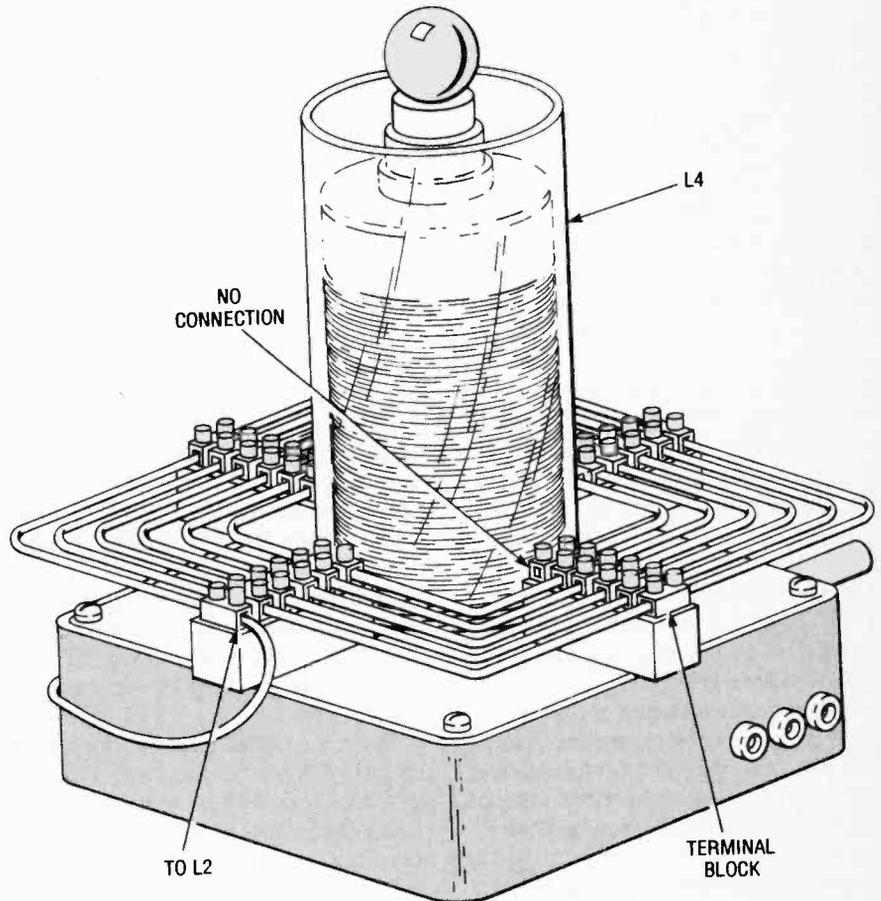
The inner winding of L3 should have an area of about 6-inches square. When making the coil be careful that you do not form wire loops, instead of the continuous coil illustrated here.
